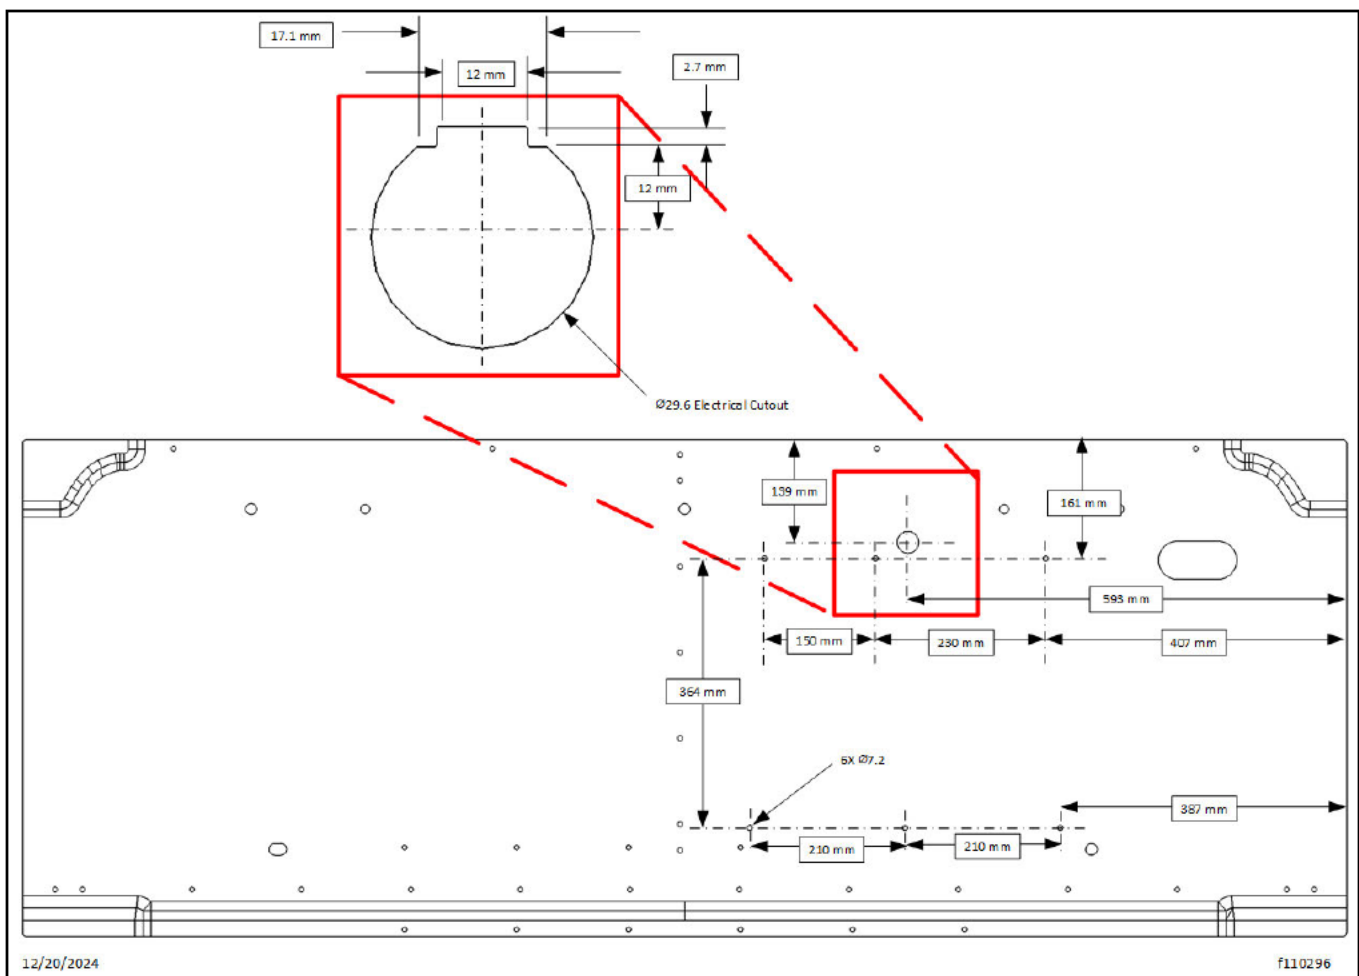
, Extended Cab Floor Drilling and Electrical Cutout
